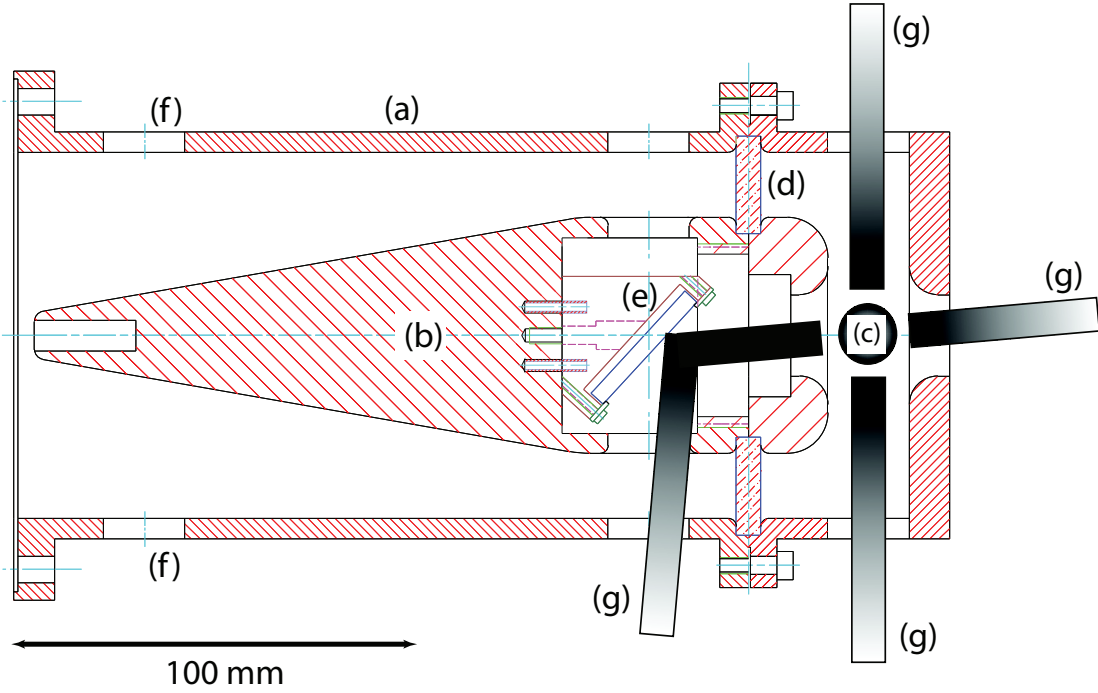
Technical drawing of the accelerator (cross section): (a) outer conductor; (b) inner conductor; (c) acceleration point; (d) glass ring; (e) mirror; (f) pumping holes; (g) laser beams.
